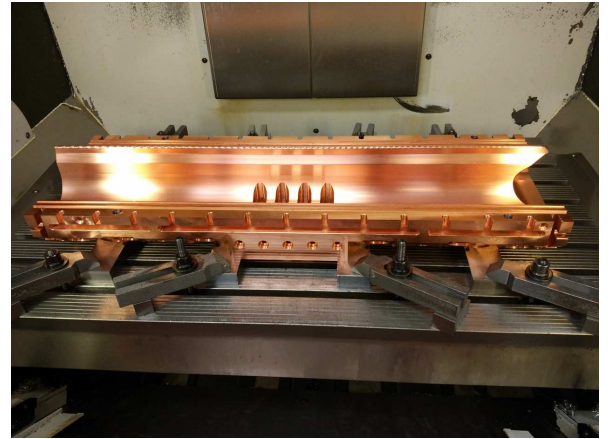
A major vane of the RFQ after fine machining in the milling machine.
